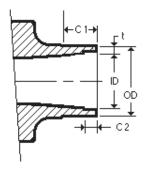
Opt-24 Butt Weld End Connection
